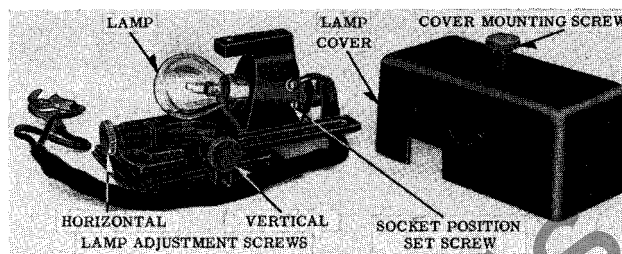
LAMP-HOUSING ASSEMBLY WITH COVER REMOVED TO SHOW INTERNAL PARTS.
